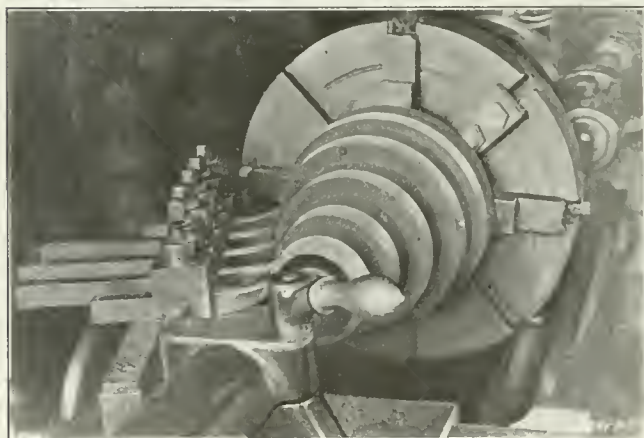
Turning the Outside of a Cone Pulley with Gang Tools
